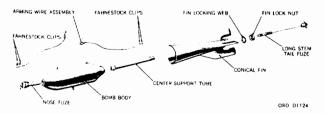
Old-series GP bomb with conical fin assembly, exploded view.
